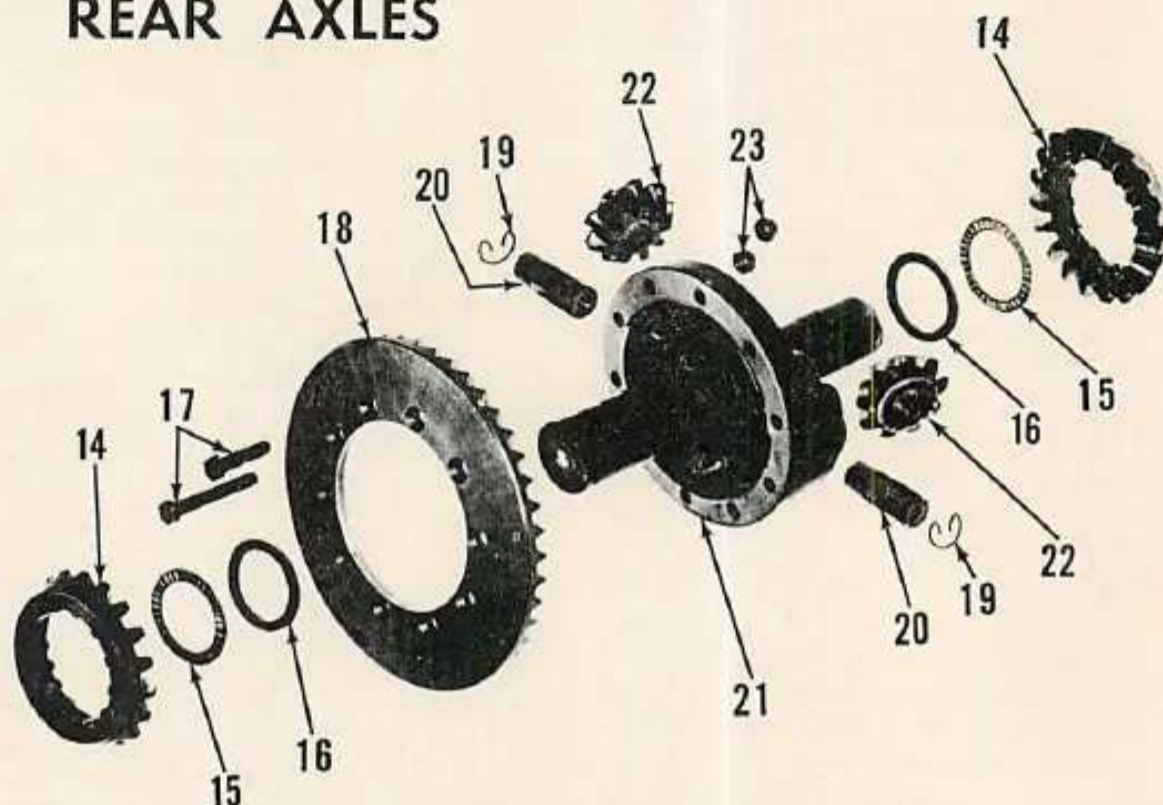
Exploded view of Series 1600 and Series 1650 differential assembly. Differential side gears (14) are carried on inner ends of the final drive bull pinions (13—Fig. O126). Outer ends of differential pinion shafts (20) are drilled and tapped to aid in removing them from differential spider.
